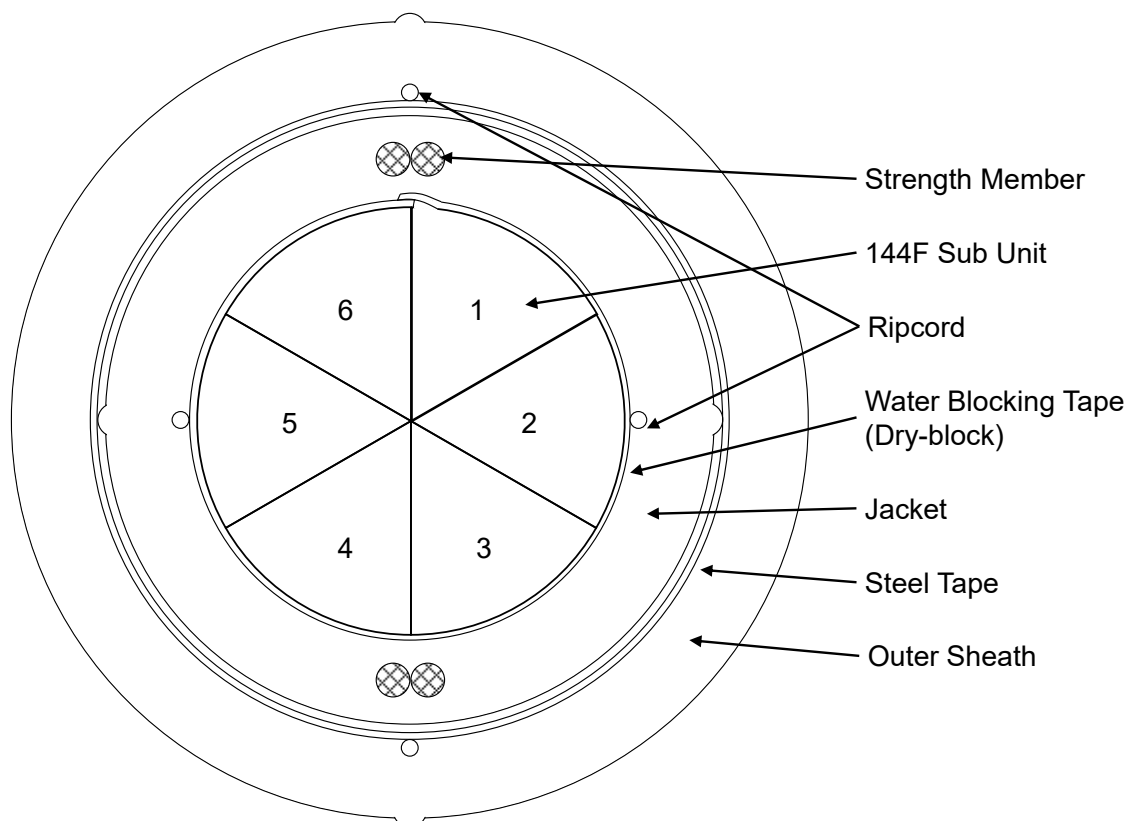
Cross Section of 864F e-Ribbon® Single-armed Cable
